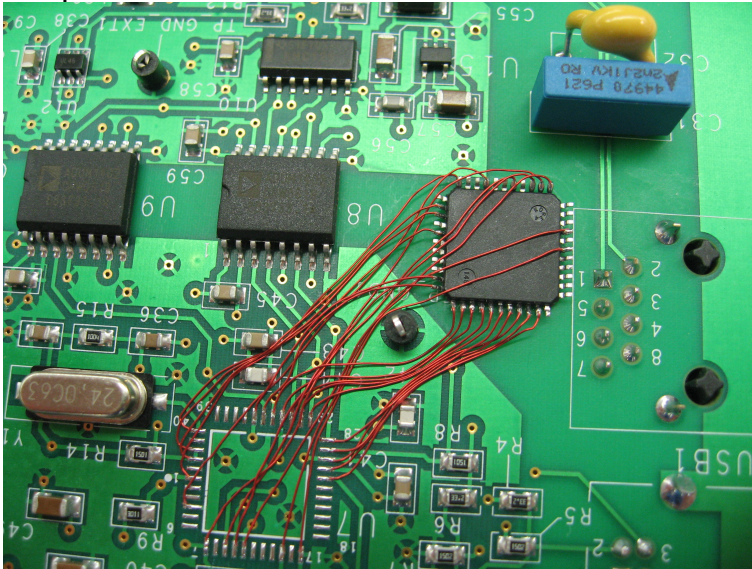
"Dead Bug" Component Workaround Example (BEST Inc.)
